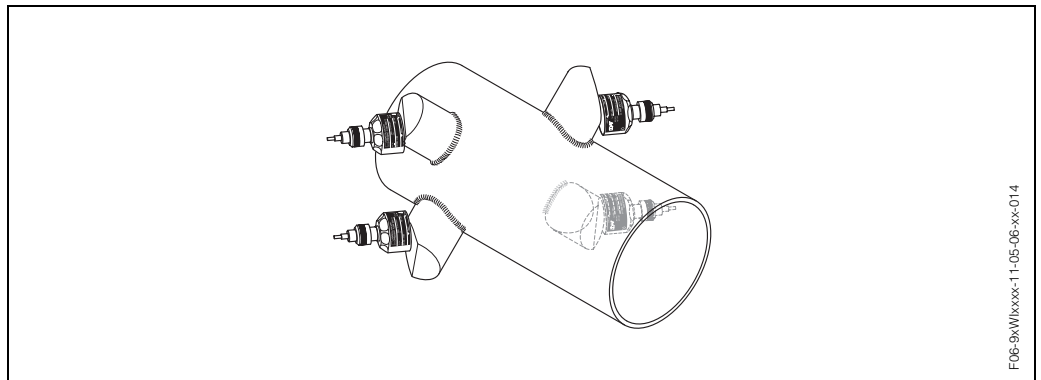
Installing the dual path measuring sensors, step 14 and 15
